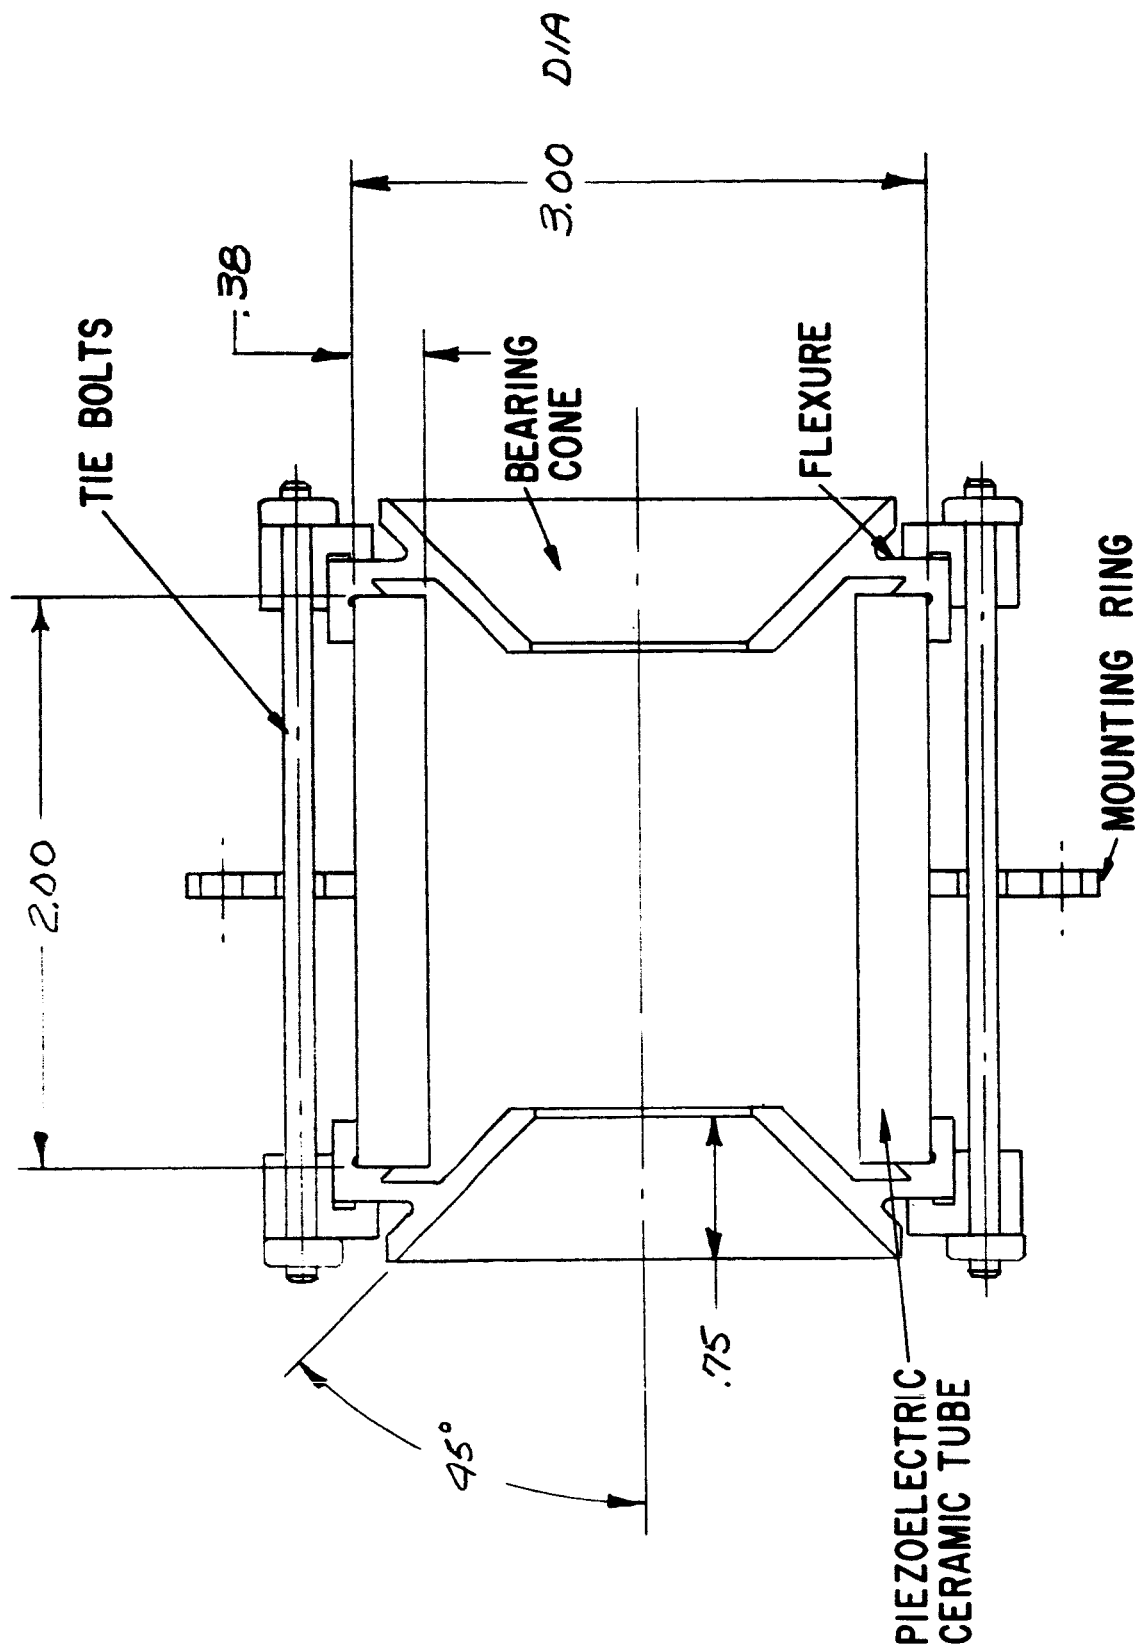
Experimental Axial-Excursion, Squeeze-Film Transducer Assembly.
